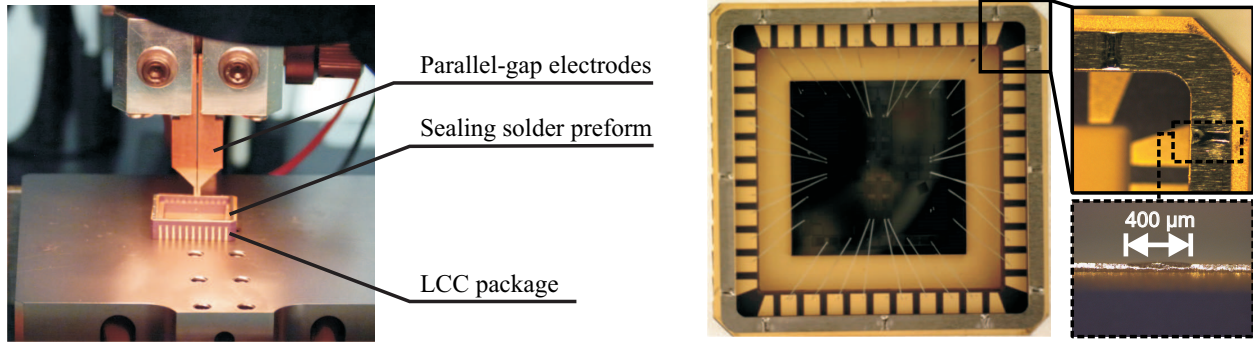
(Left) a low power tack-welding setup to attach AuSn sealing solder preform frame to the seal ring of an LCC package. (Right) an LCC package with sealing solder preform attached using tack-welding, a magnified view of welding spots (top-right), a side view of a welding spot showing  $\sim 400 \mu\text{m}$  width of the heat affected zone.
